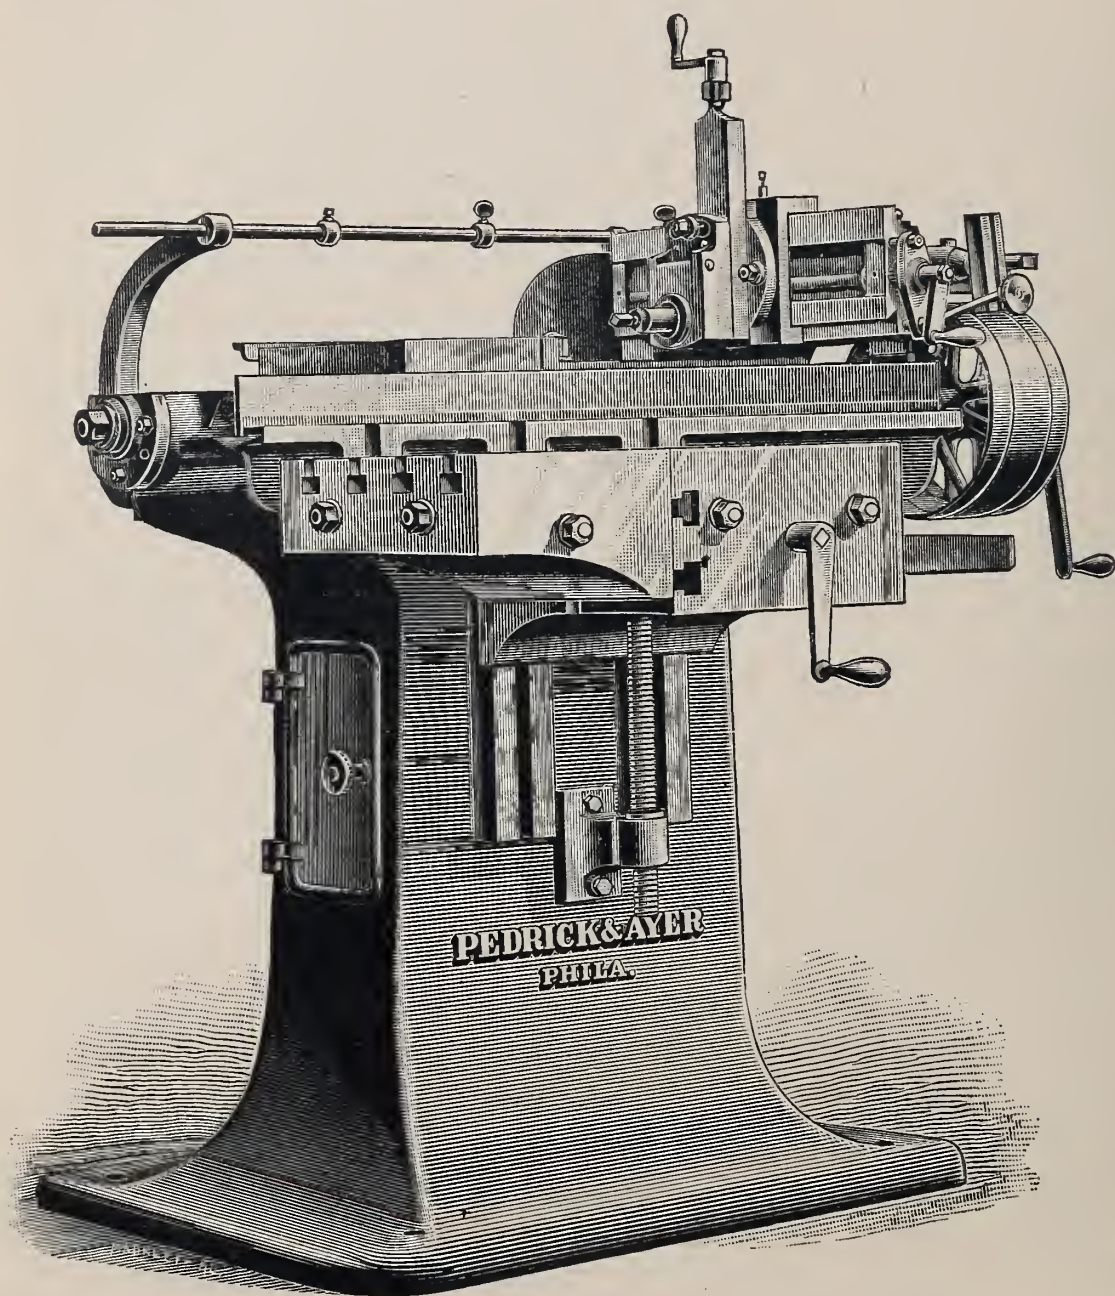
SIDE PLANING MACHINE.—12 × 30 INCHES.
